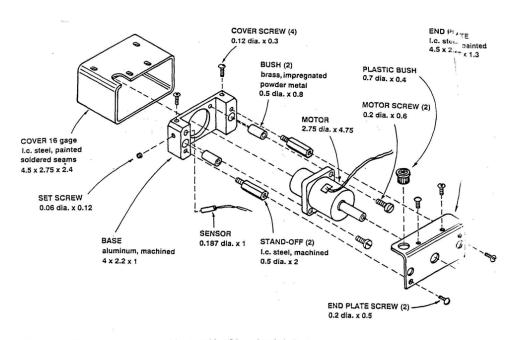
Proposed design of motor drive assembly. (Dimensions in inches.)
